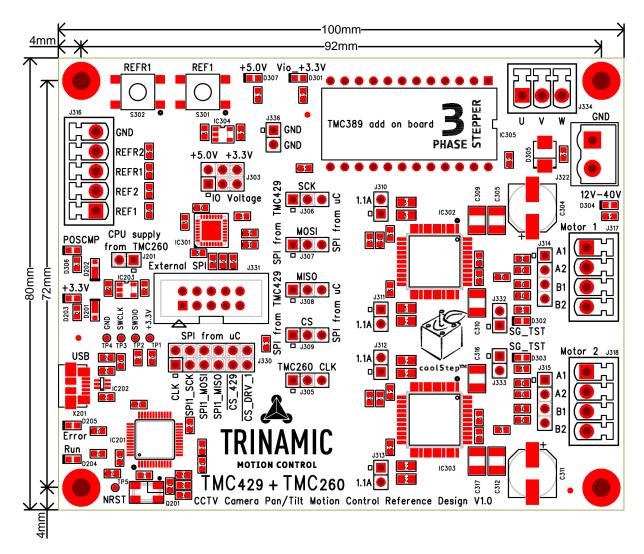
Dimensions of TMC429 + TMC260 CCTV Reference Design Board
